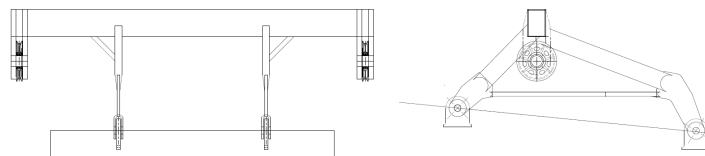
Top lifting frame, front view (left) and side view (right)
